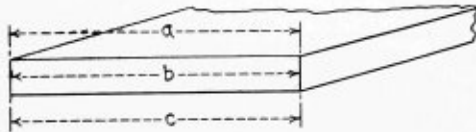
In a flat piece of boiler plate, dimensions a , b and c remain the same
